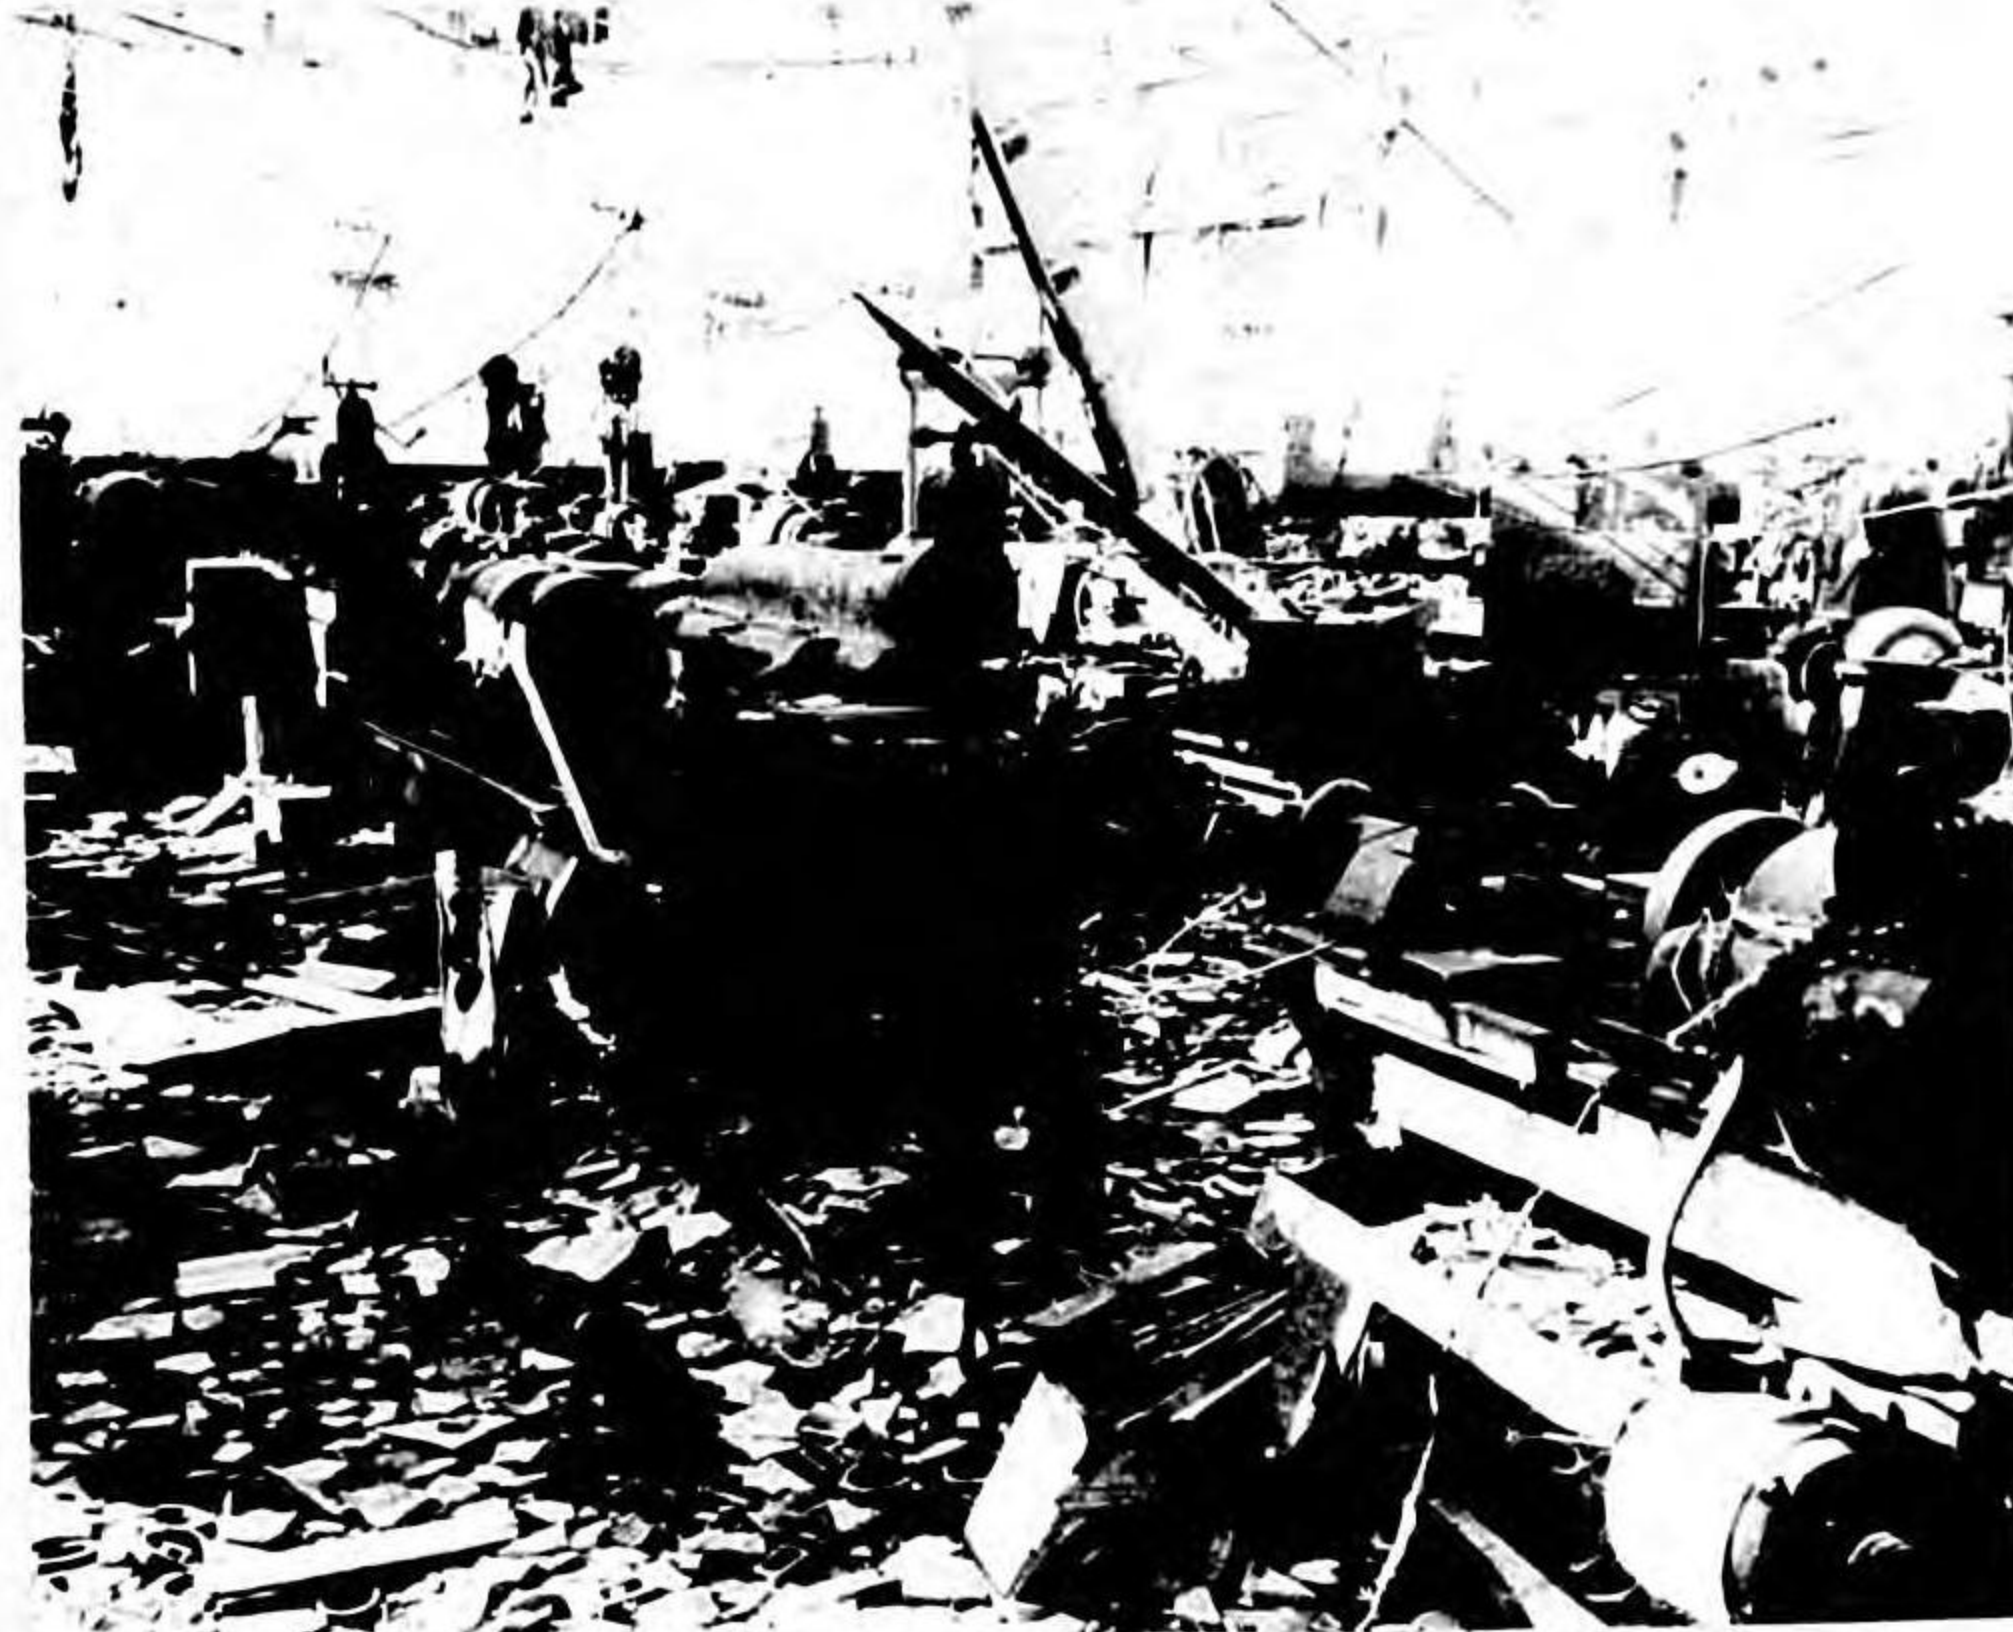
Nagasaki, 3,700 feet from GZ. Electric wiring destroyed by blast, and machine tools slightly damaged by debris.
